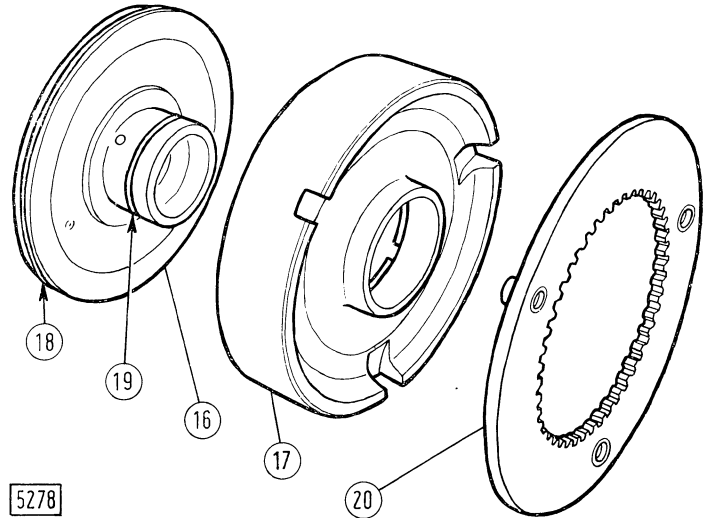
Exploded View of Low/Intermediate/Reverse/Forward-speed Clutch Hydraulic Power Cylinder
